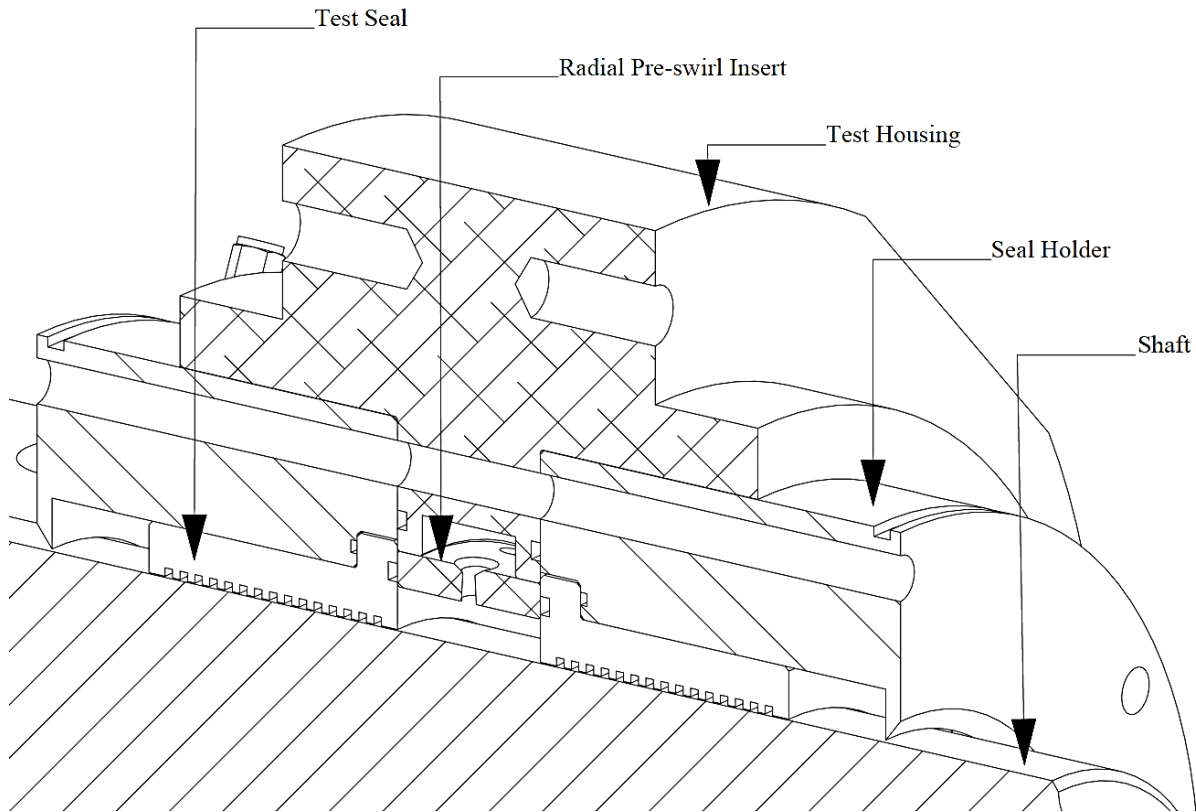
Cross-section view of test section's core fitted with the low PSR insert.
